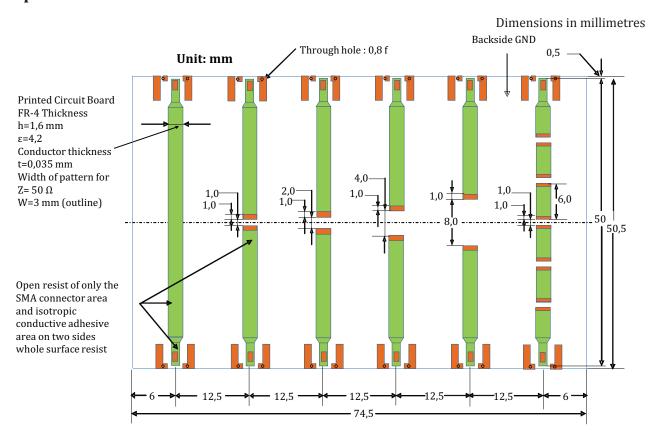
Plane dimensions of a standard test circuit board for measurement of the X-Y plane
